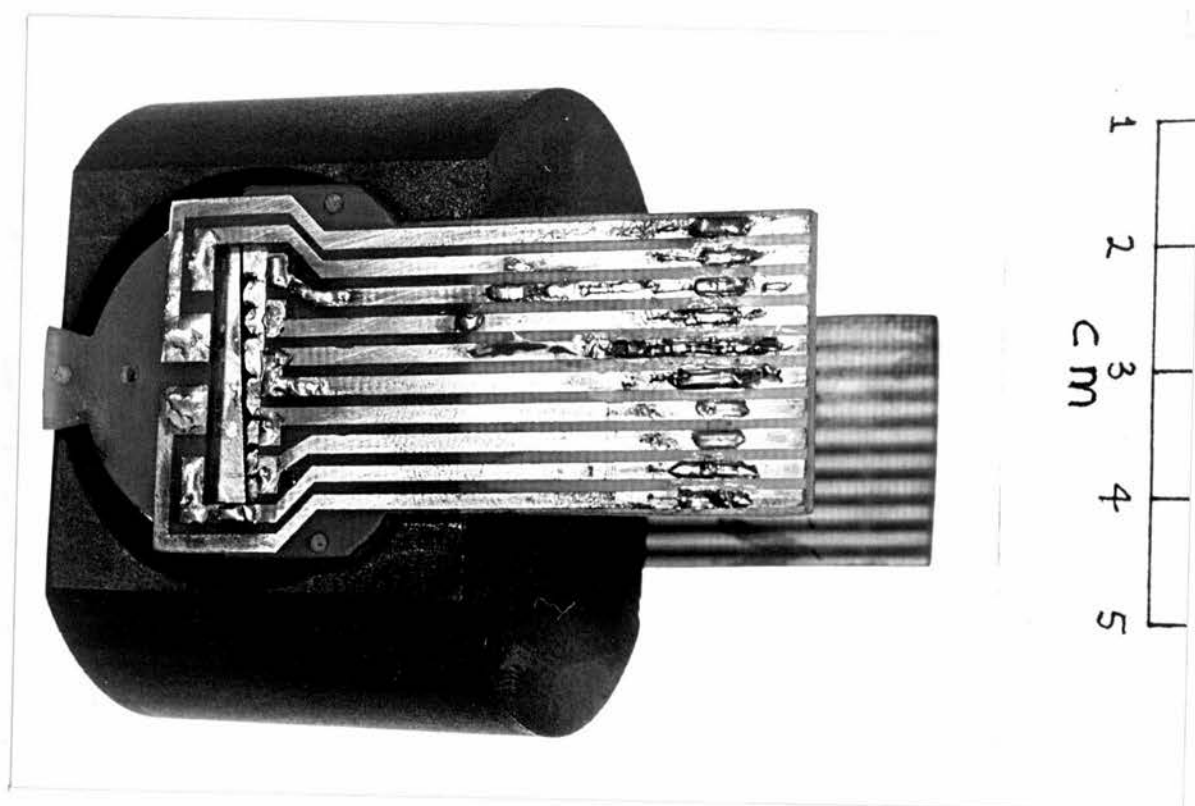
MANTLE/CRADLE ASSEMBLY WITH PRINTED CIRCUIT BOARDS ATTACHED
